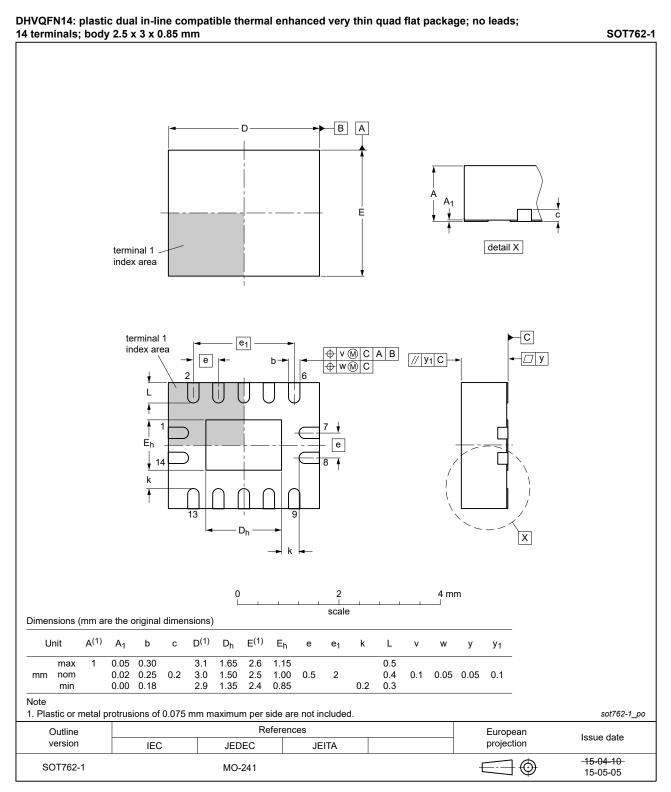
Package outline SOT762-1 (DHVQFN14)
